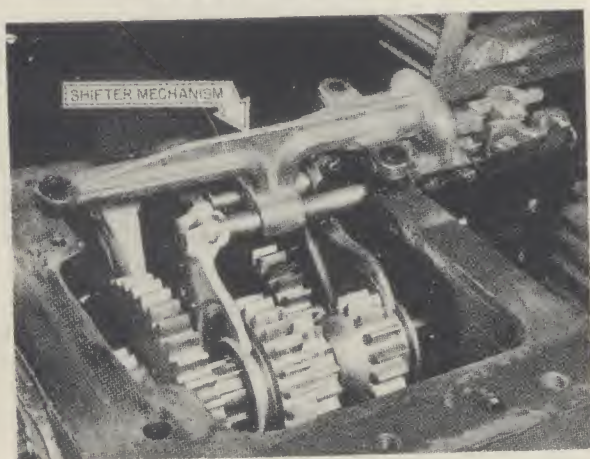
Removing gear shifters and forks assembly from Super 99 four speed transmission.
